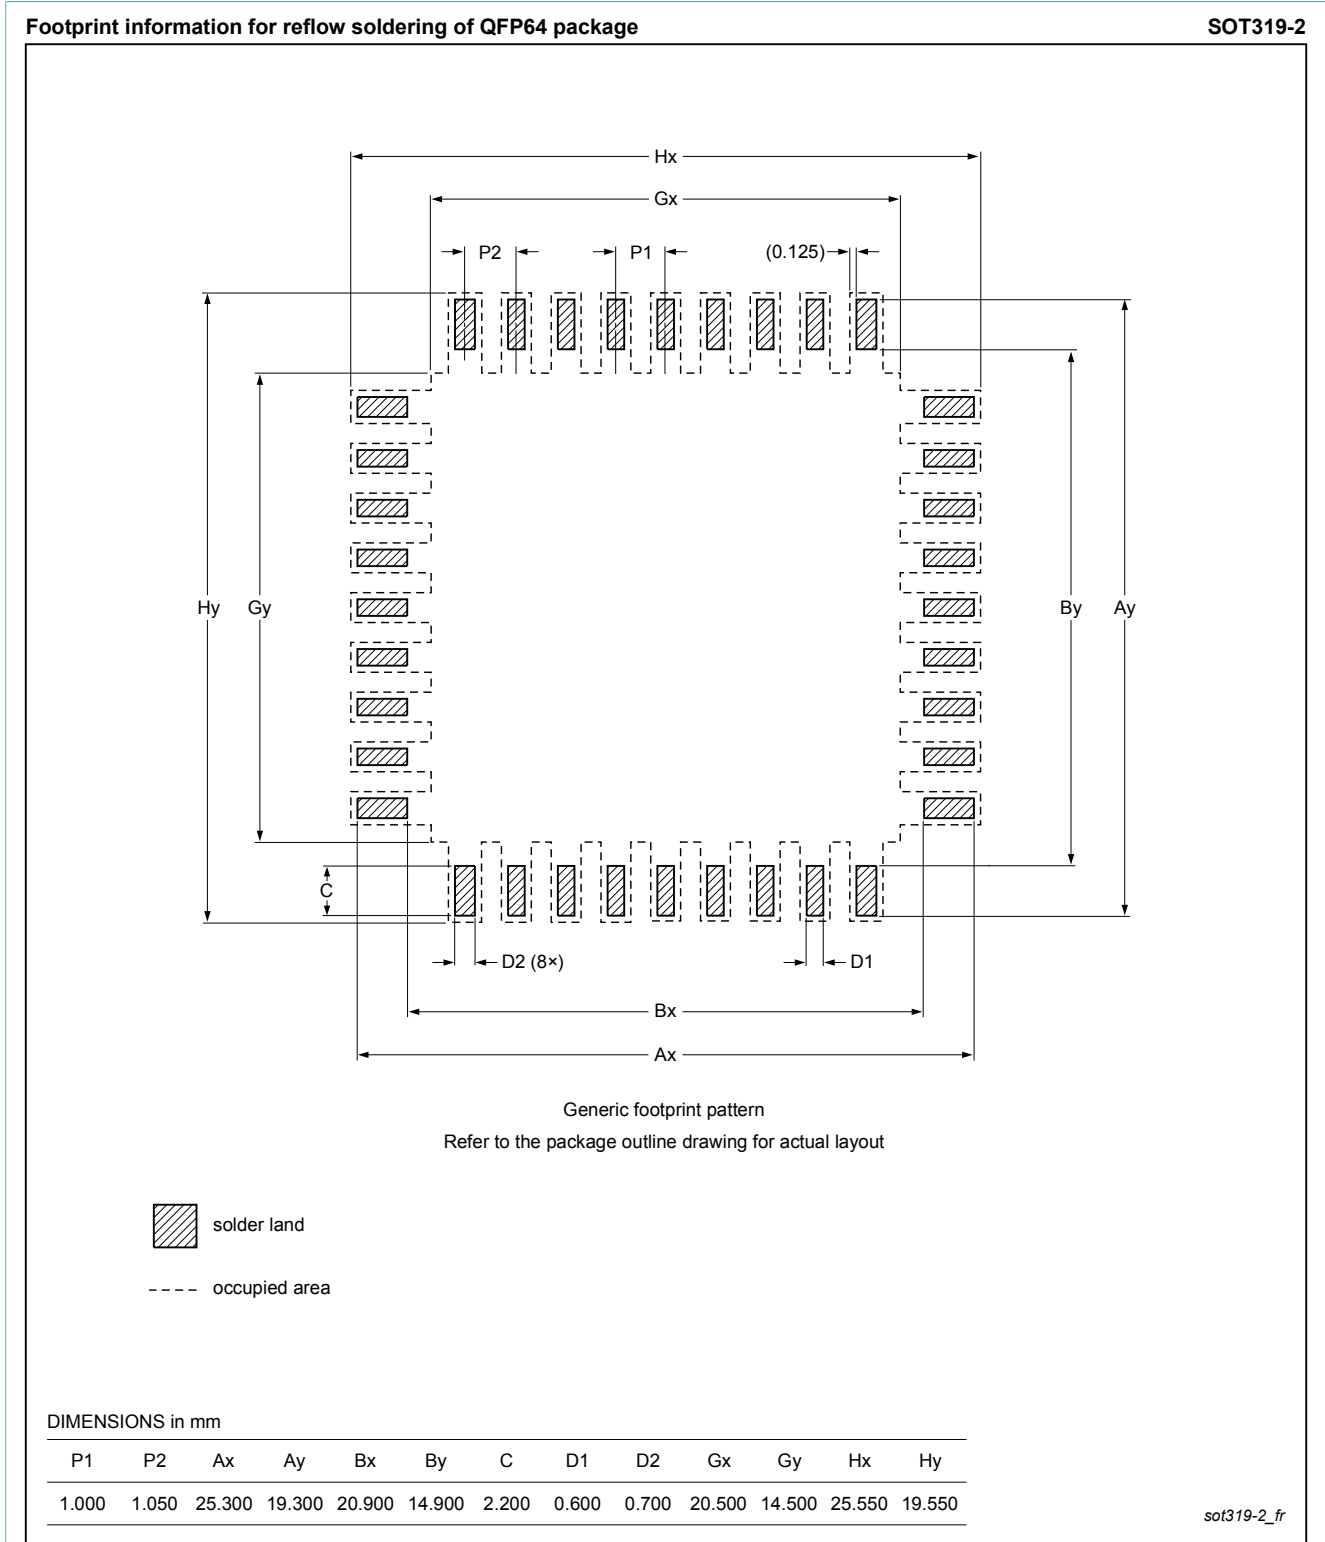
Reflow soldering footprint for QFP64 (SOT319-2)
